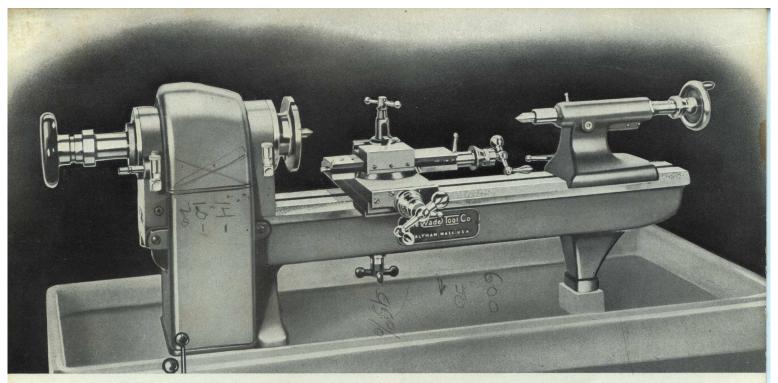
Wade Hand Screw Machine Equipped with Tailstock and Compound Slide Rest for Tool Room Work
